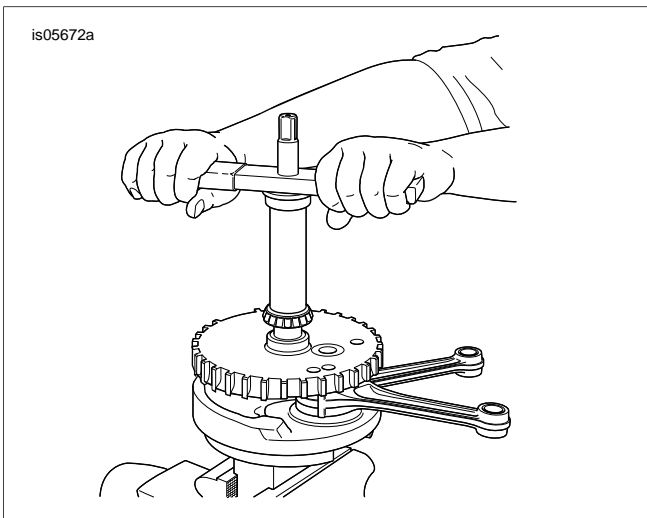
Press Inner Bearing Cone to sprocket Shaft
